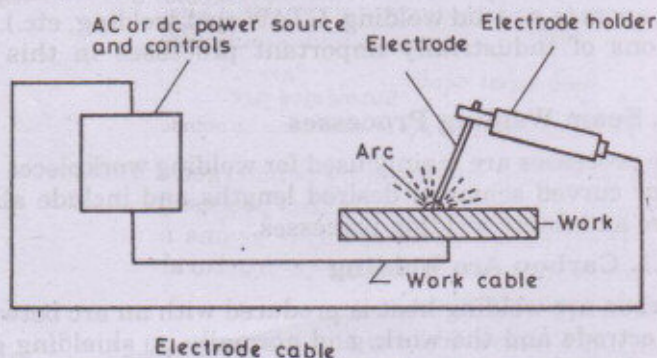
Basic circuit for shielded metal arc welding.
